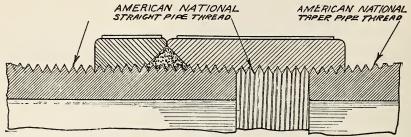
Illustration of "long screw" joint between straight threaded coupling and taper threaded pipe.
